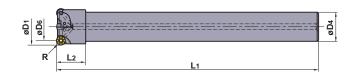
(Type without the centre cutting edge (multi-tooth))
